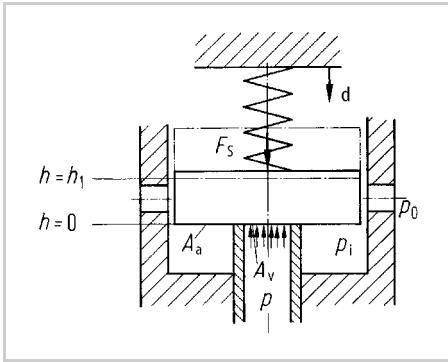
Solution principle for a valve with an unstable opening mechanism: d = precompression of spring; s = stiffness of spring; F_s = spring force; h = lift of valve head; p = pressure on valve; p_i = limiting pressure just sufficient to open the valve; p_i' = intermediate pressure upon opening of valve; p' = pressure after opening of valve; p_0 = atmospheric pressure; A_v = surface area of valve opening; A_a = additional surface area.
